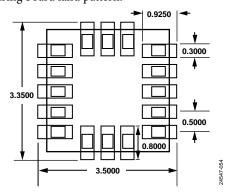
Recommended Printed Wiring Board Land Pattern (Dimensions Shown in Millimeters)
